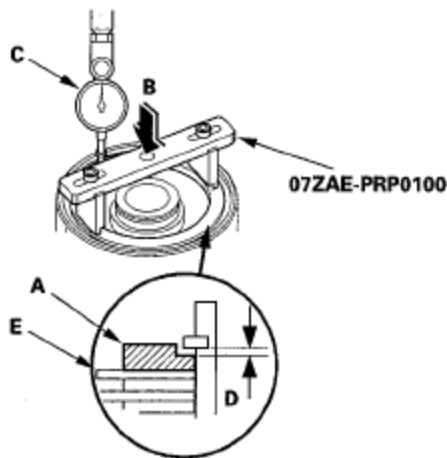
Measuring Clearance Between Clutch End-Plate And Top Disc
